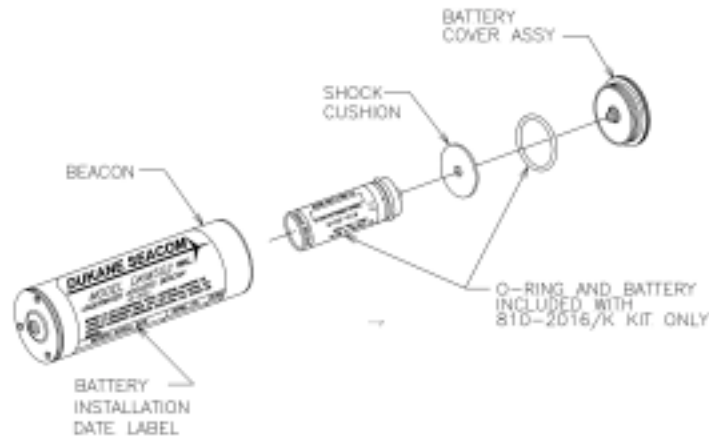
Beacon Exploded View Showing Relative Location of Battery and Related Parts
